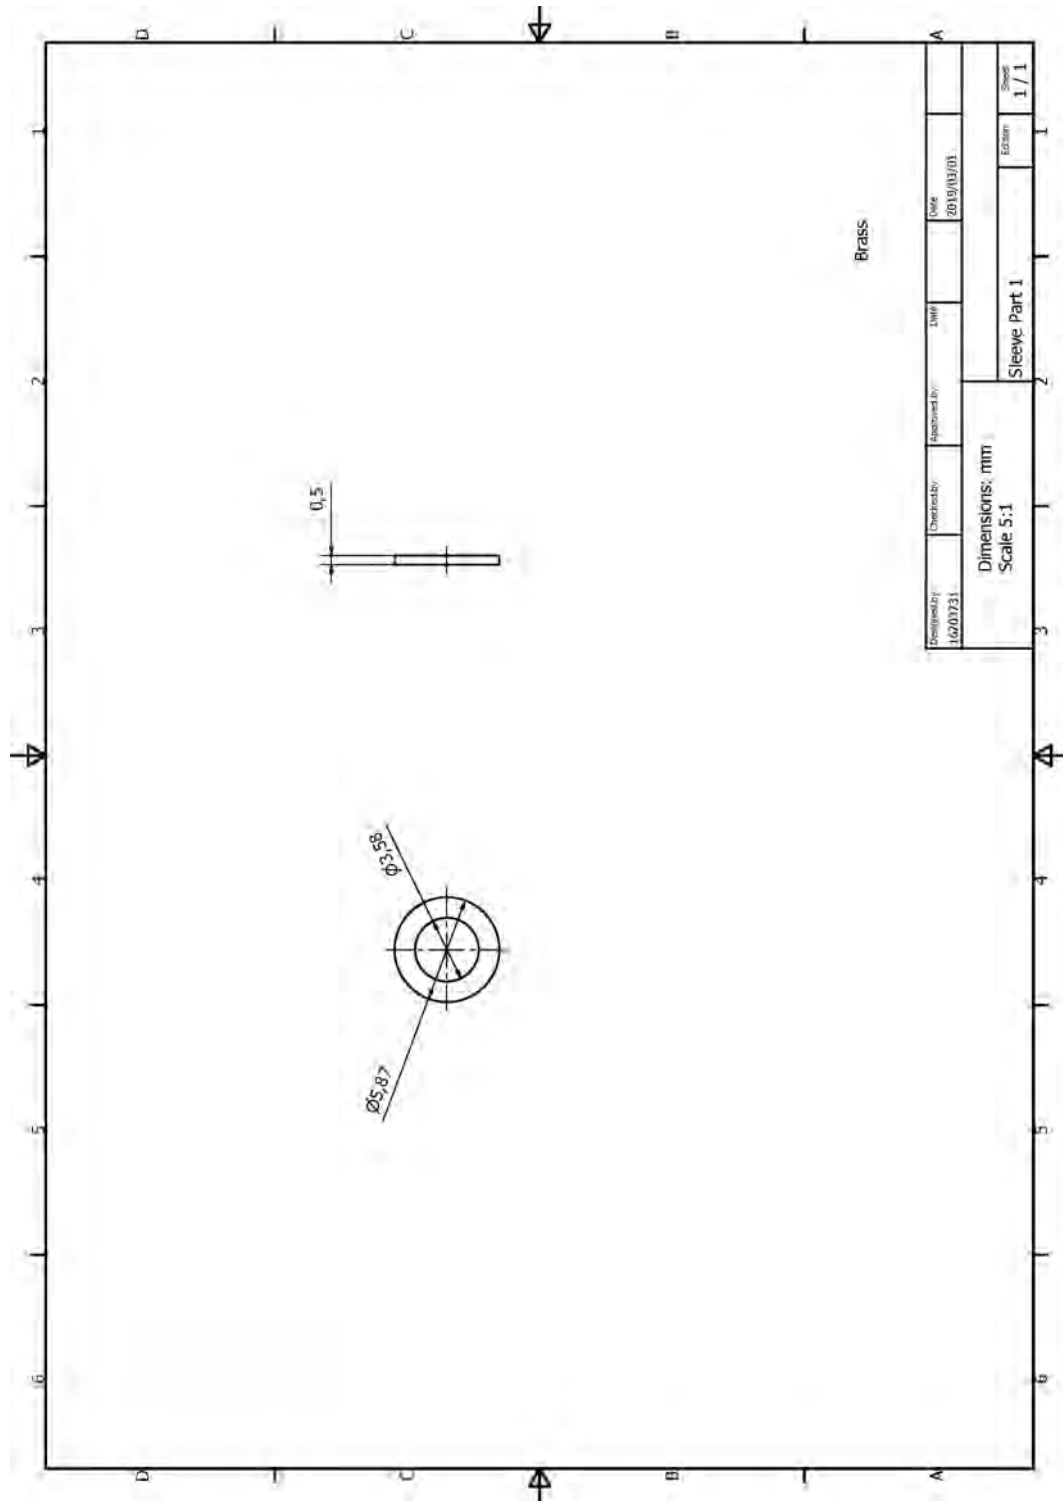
1:100 scale model sleeve balun part 1 engineering drawing. This engineering drawing shows the part of the sleeve balun which is connected to the furthest point from the radiation creating the short-circuit, of both models.
